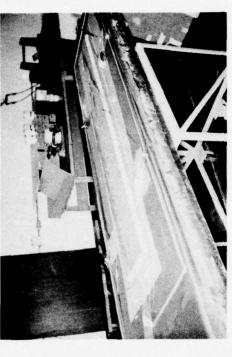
VACUUM DEBULKING OF SPOILER ASSEMBLY
